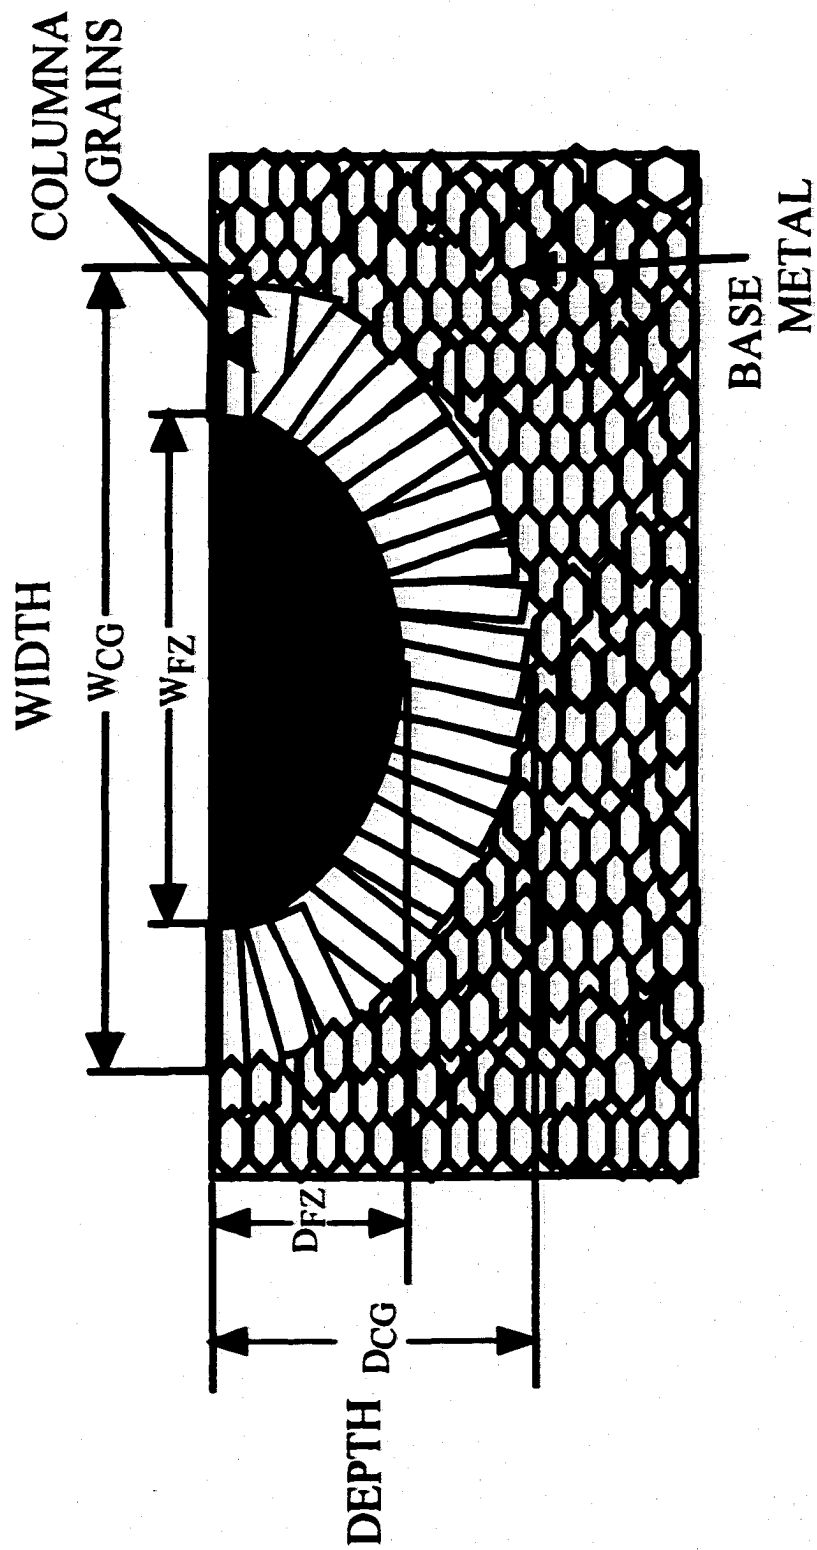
Schematic drawing of the weld pool cross section.
